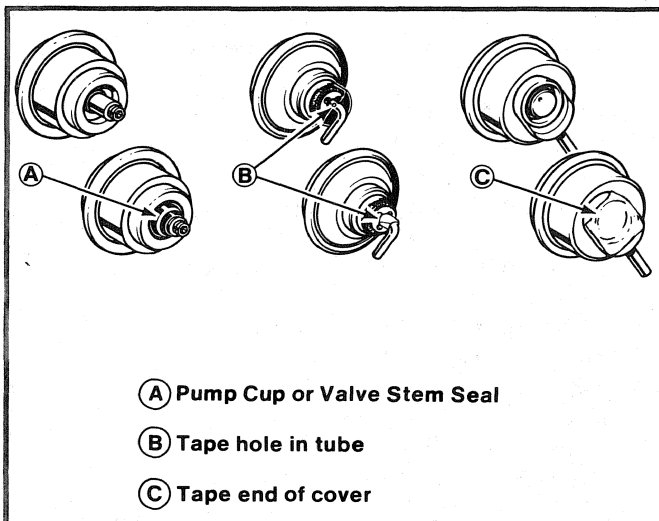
C1- 12 -- Plugging Vacuum Break Bleed Holes
